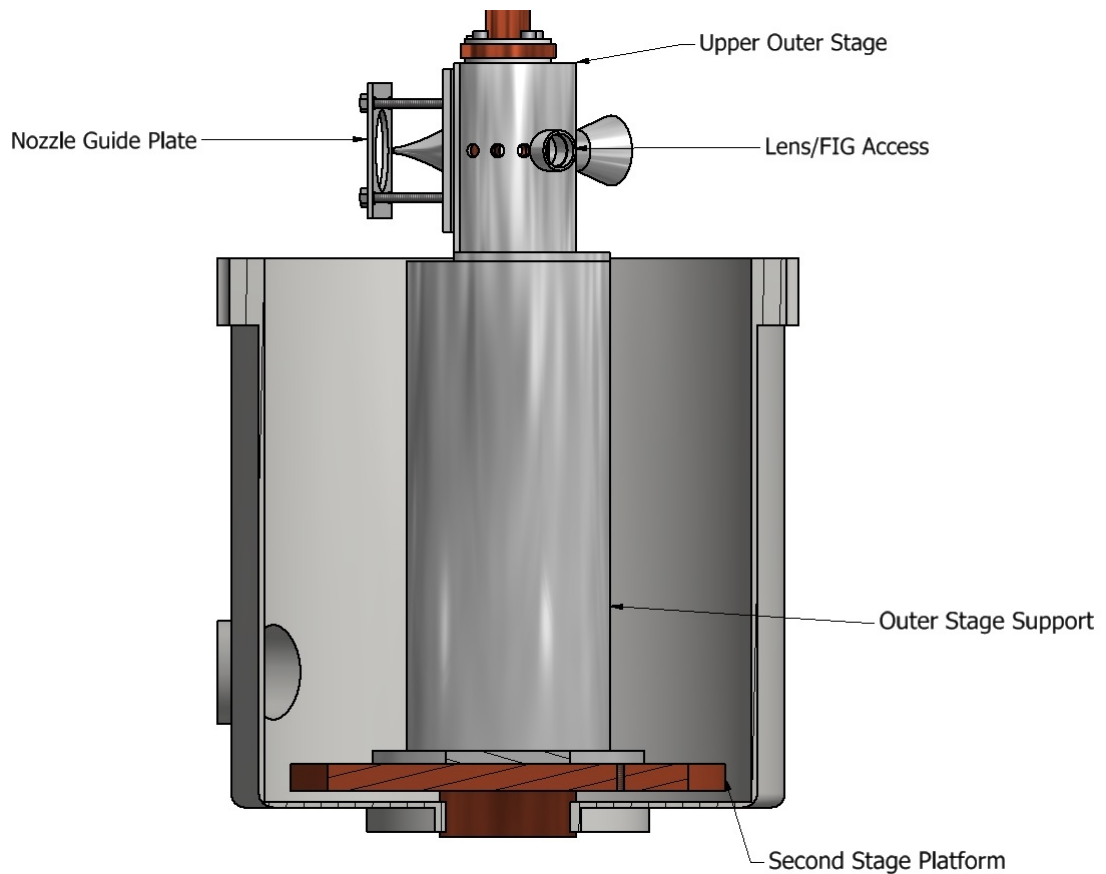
Cross-section view of outer stage assembly mounted on the cryostat.
